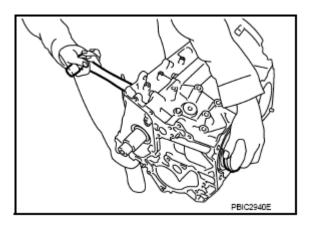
Pushing Piston And Connecting Rod Assembly Using Hammer Handle Courtesy of NISSAN NORTH AMERICA, INC.
